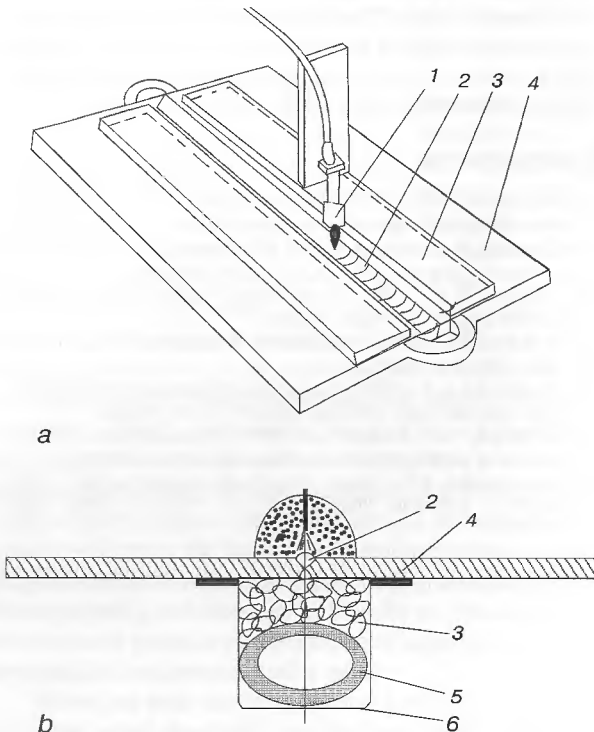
Example of application of dry ice [17, 27]: a — cooling of heat-affected zone; b — cooling of the weld and heat-affected zone: 1 — welding head; 2 — weld; 3 — dry ice; 4 — parts being welded; 5 — pneumatic hose; 6 — channel-bar.
